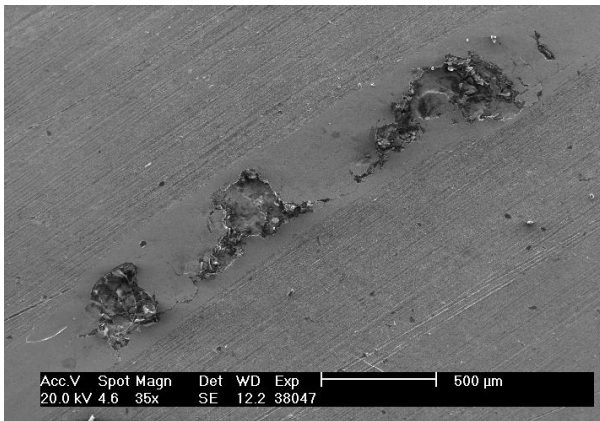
Micrographs of developed contact damage on the surface of bearing steel
